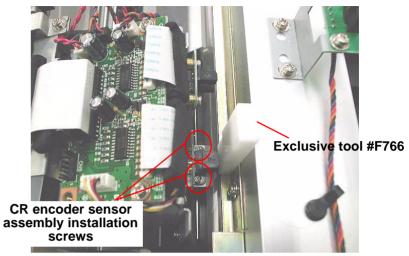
CR Encoder Sensor Installation Position Adjustment
